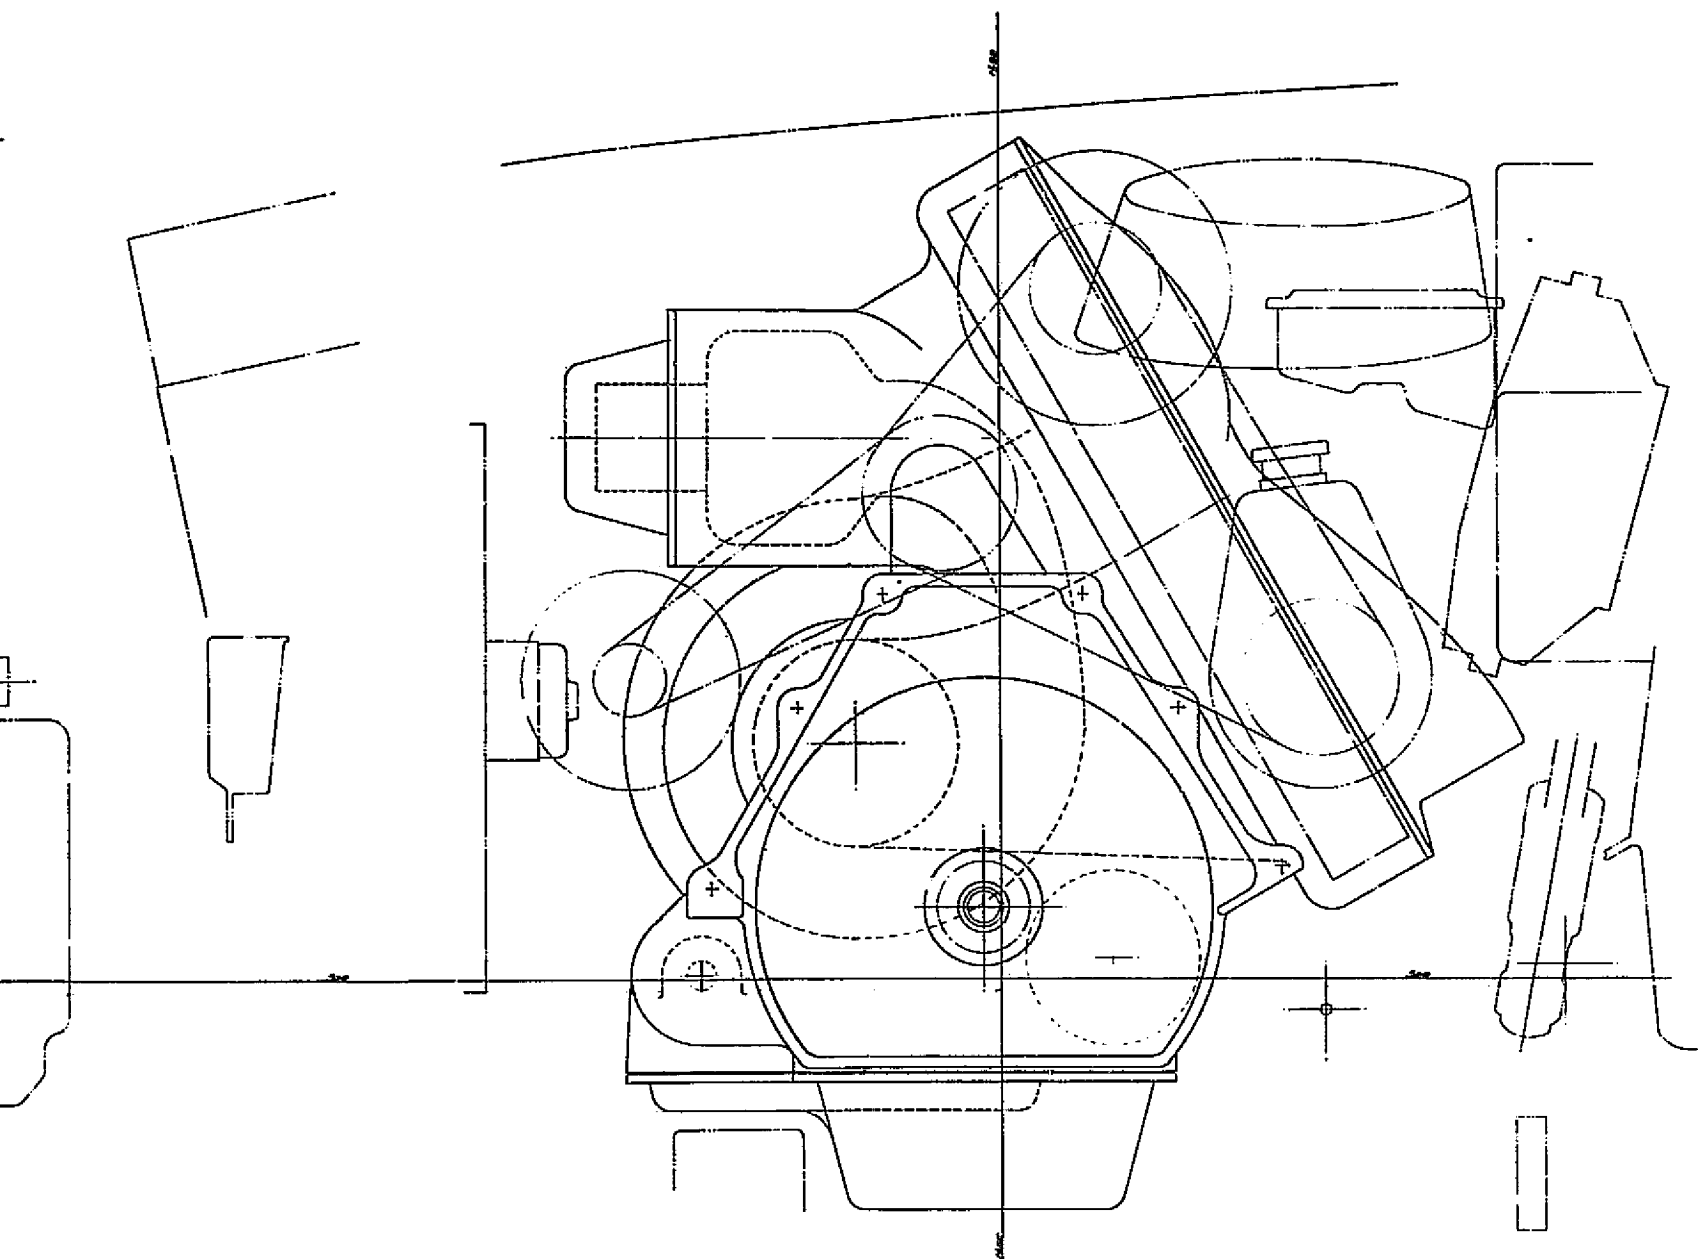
General arrangement—single-shaft engine, one regenerator, can combustor, reentry turbine.
